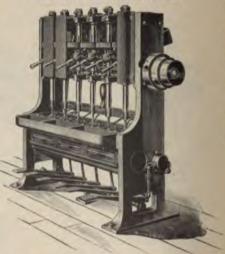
SHOWS BIX SPINDLE MACHINE.
